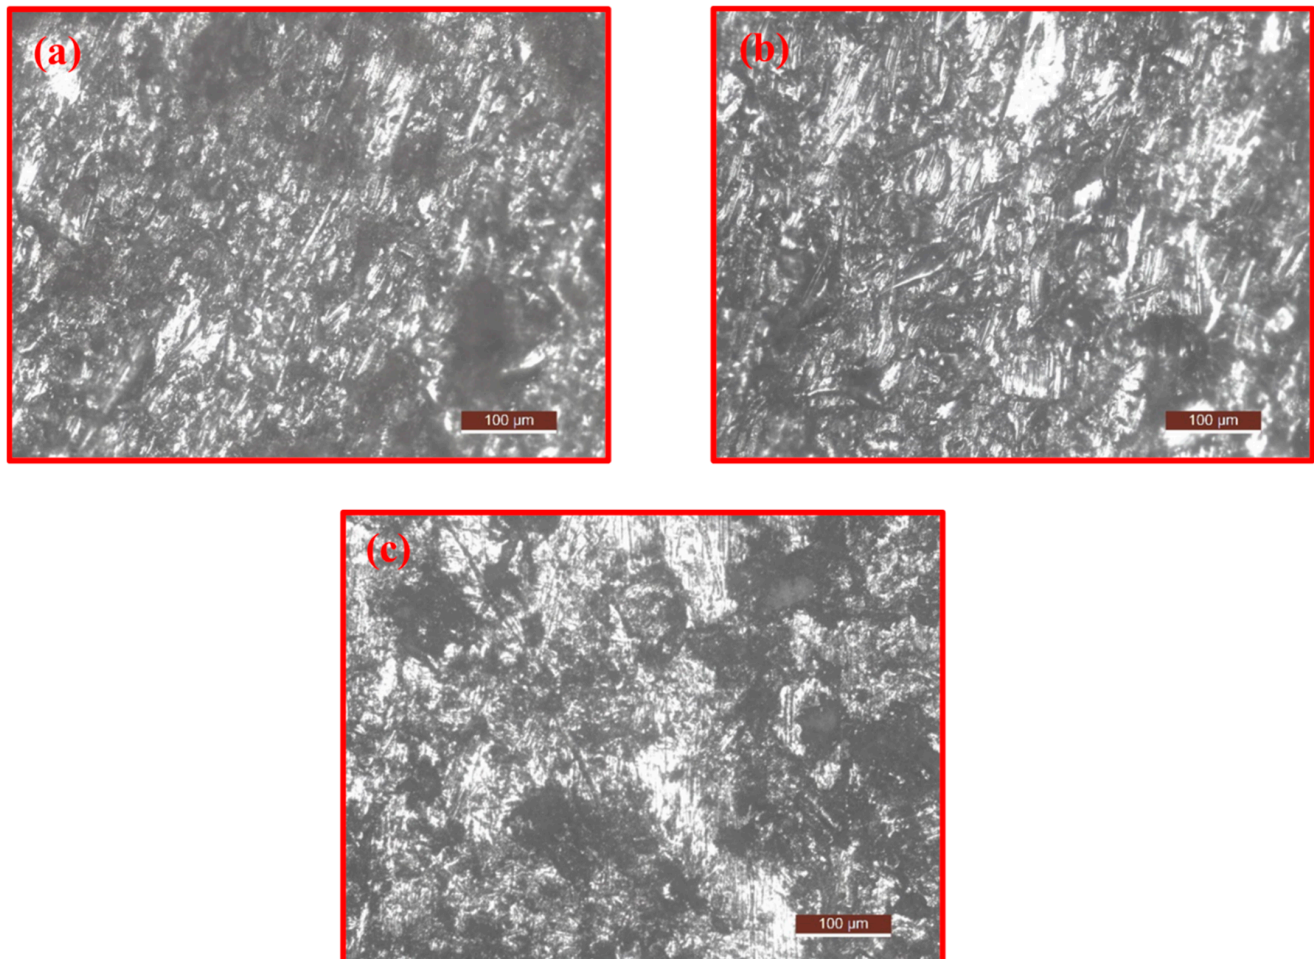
Fracture surface optical micrograph (a) base metal, (b) weldment-1, (c) weldment-2.
